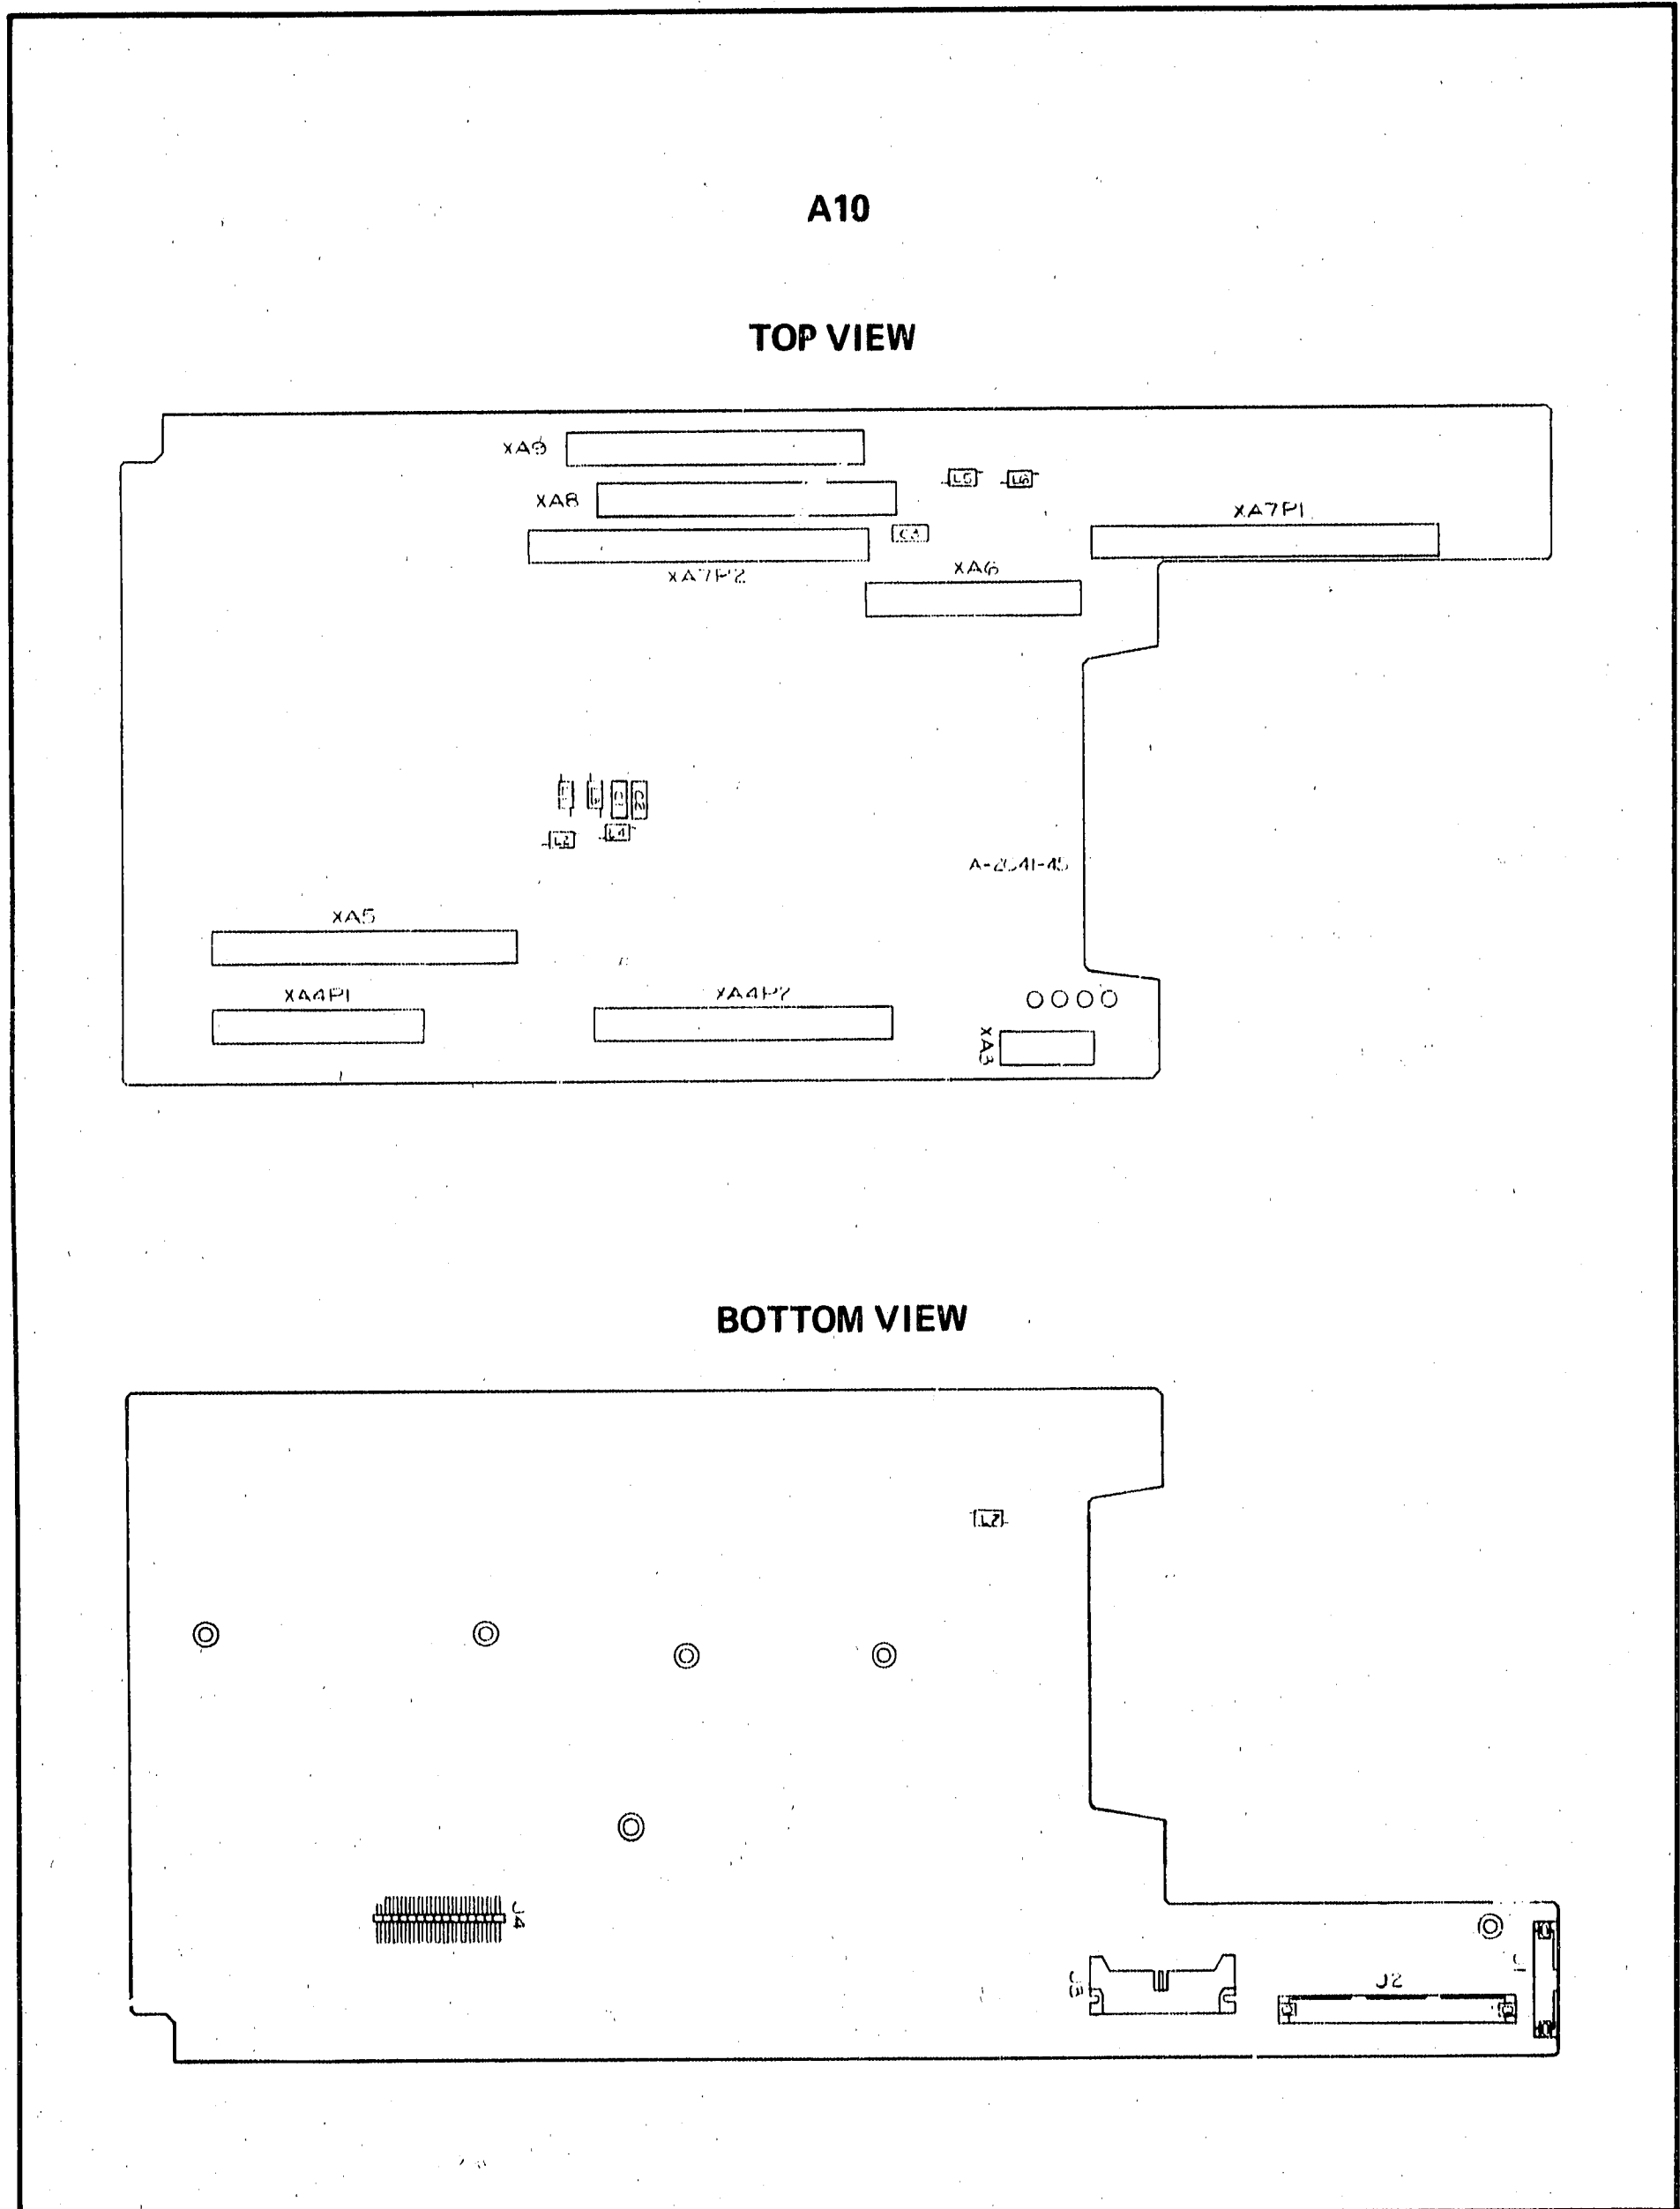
A10 Display Motherboard Assembly, Component Locations
